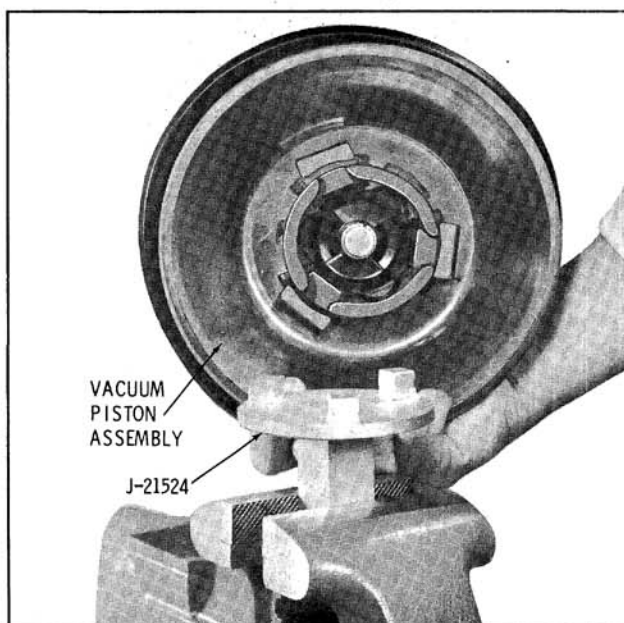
Positioning Vacuum Piston on Tool J-21524
